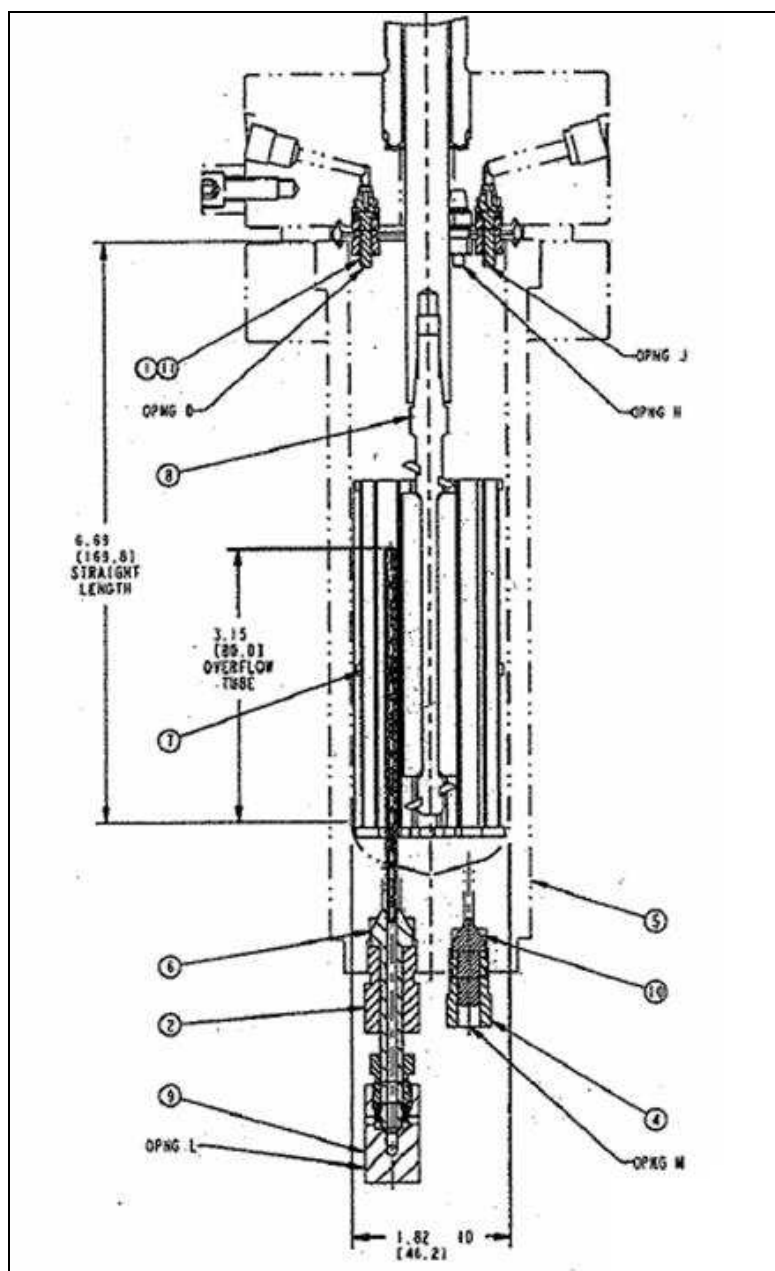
Robinson-Mahoney stationary basket reactor design, Property of, and used with the permission of Snap-Tite, Inc. The overflow tube has been placed in opening H in a U-shape design instead of a connection to the bottom opening L
